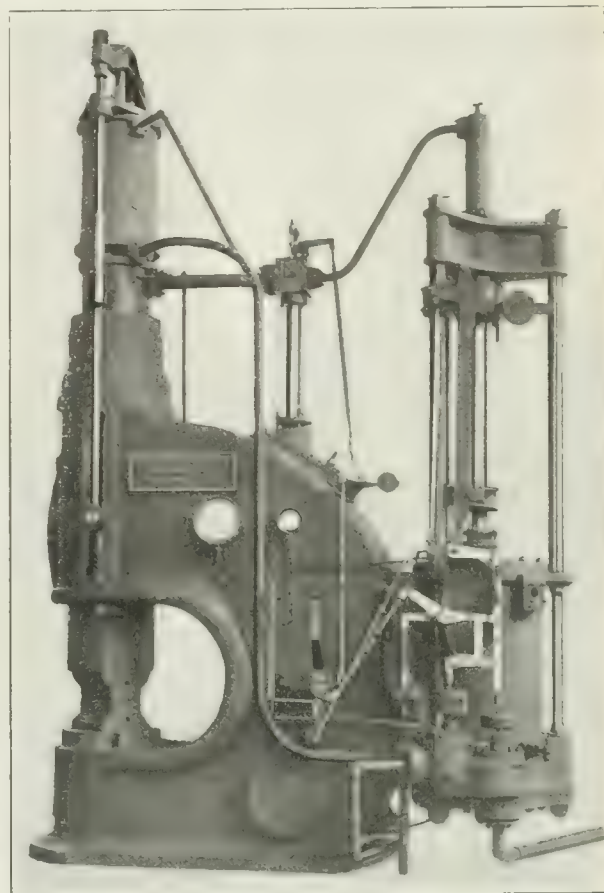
The Control Applied to a Davy Steam Hydraulic Forging Press, Built by the United Engineering & Foundry Company, Pittsburgh, Pa.
